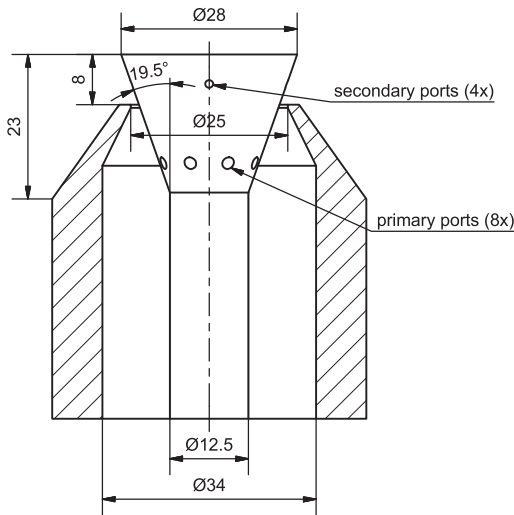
Schematic of the PPBB burner (dimensions in mm).
